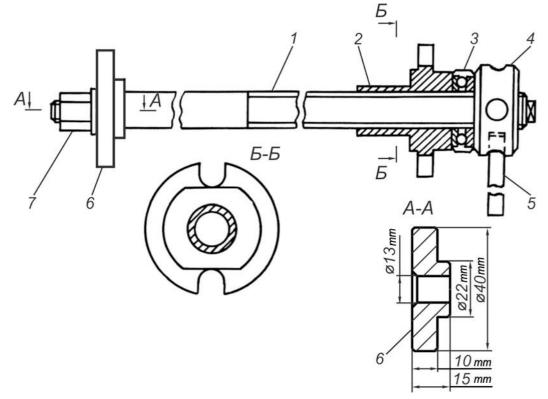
Spring removal and installation tool: 1 - screw; 2 - support ring; 3 - bearing; 4,7 - nuts; 5 - tap wrench; 6 - washer
